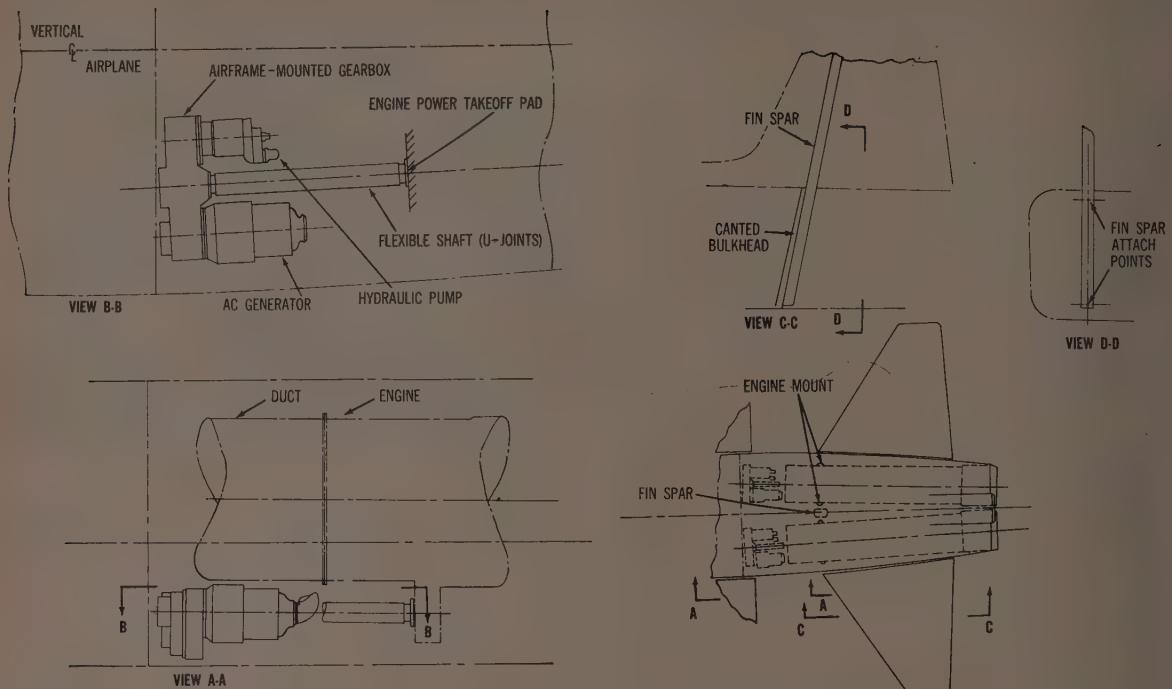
Engine installation, showing simple, rugged attachment of the fin spar and accessory-to-engine jacks-
